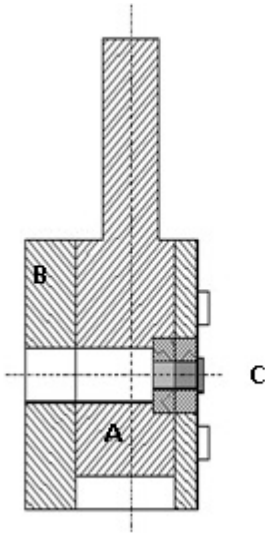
Schematic drawing of the sample (C) placed inside the device. A and B corresponds to the lateral sections of the device.
